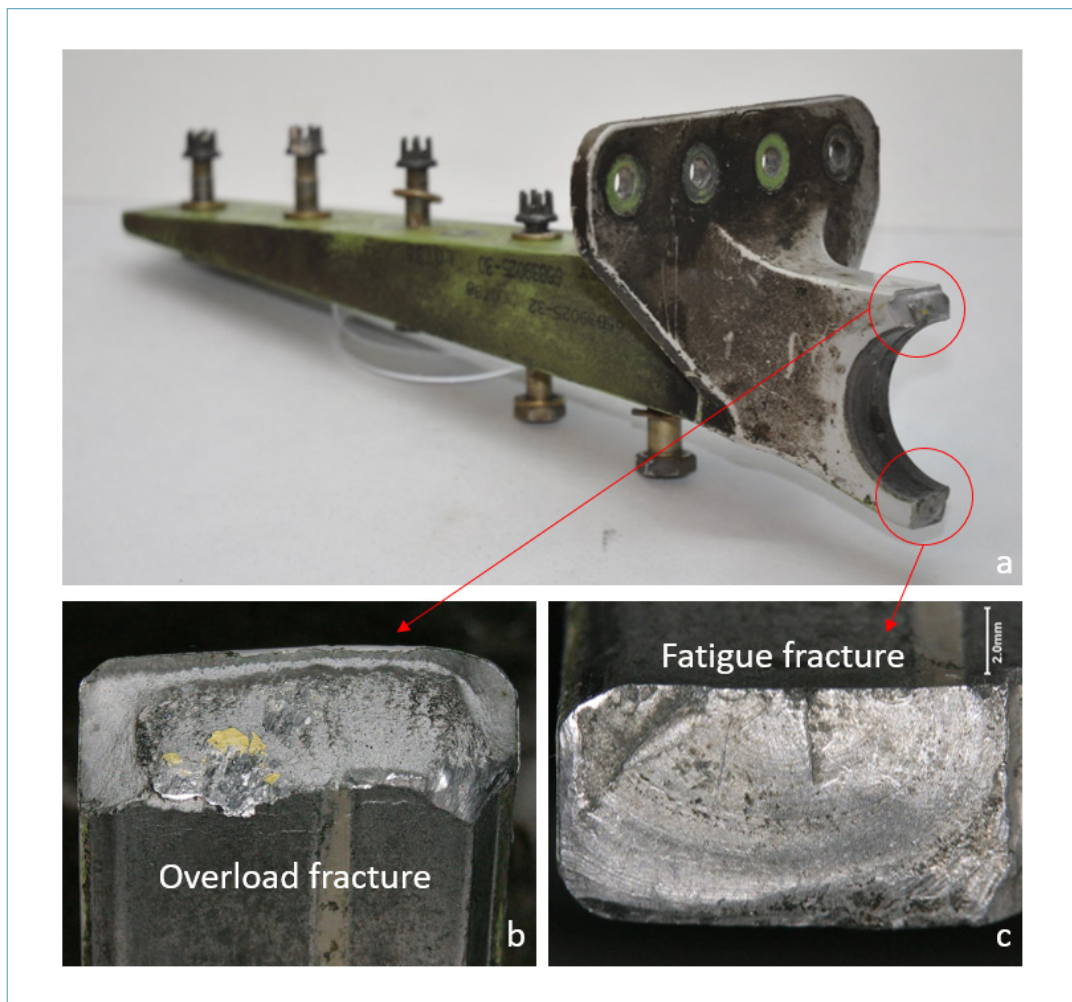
Broken outboard foreflap fitting lug (a), overload fracture (b) and fatigue fracture (c) surfaces. (Source: owner of the aircraft)
